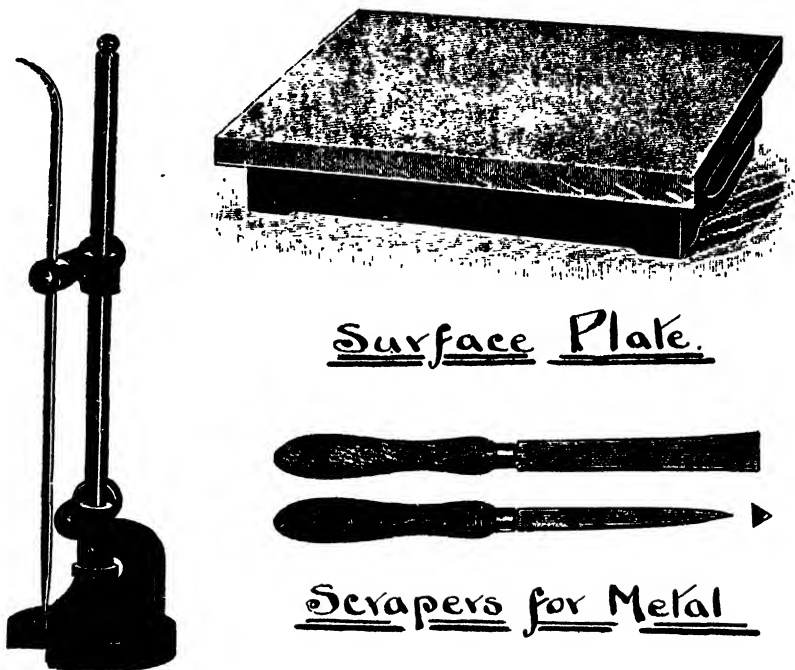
FITTING PRACTICE. TOOL MAKING. CITY AND GUILDS TESTS.
